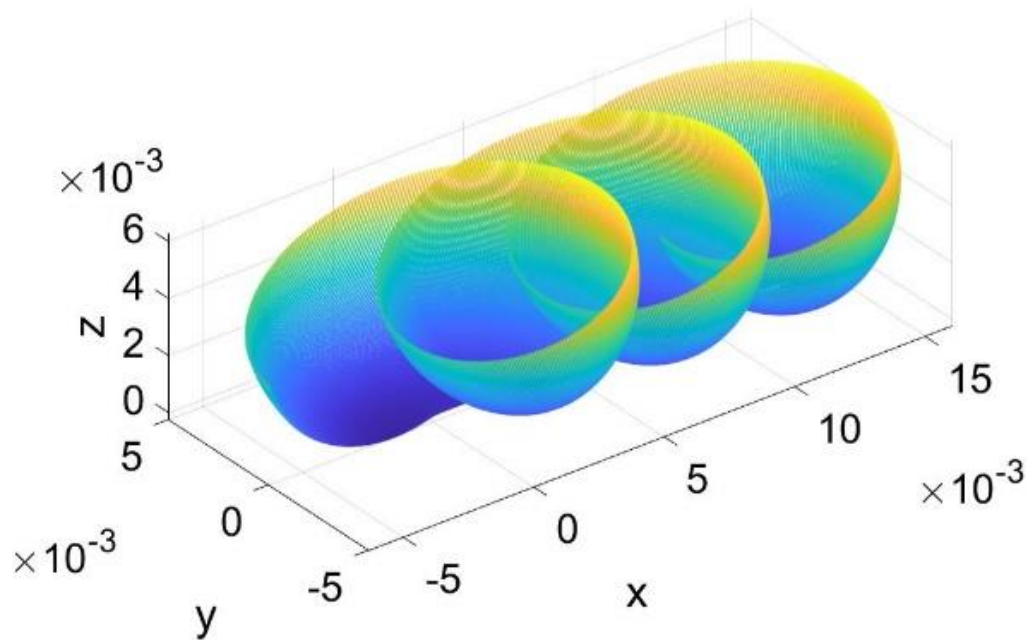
Overall 3D view of a cutting model with one cutting edge and lead angle applied (dimension in m)
